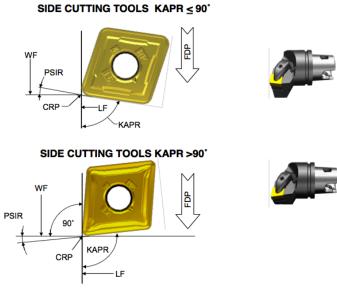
Cutting Tool Measurement Diagram 4 (Cutting Item – ISO 13399)
